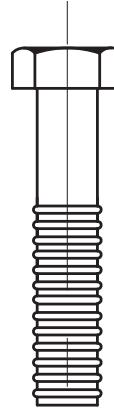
HEX HEAD BOLT – WEIGHT PER 100
